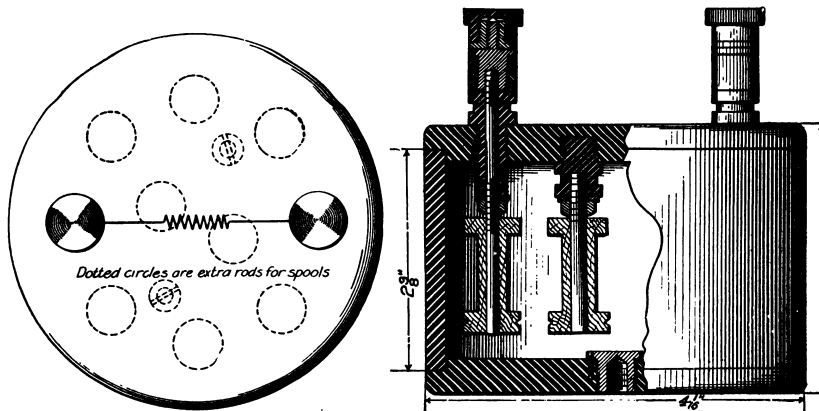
BOX, 100,000 OHM., STANDARD.
